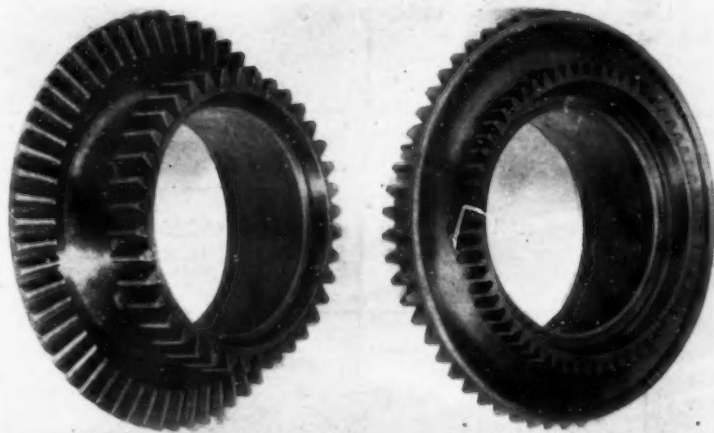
Mercedes-Benz D.B. 601A valve and auxiliary drive wheel.
